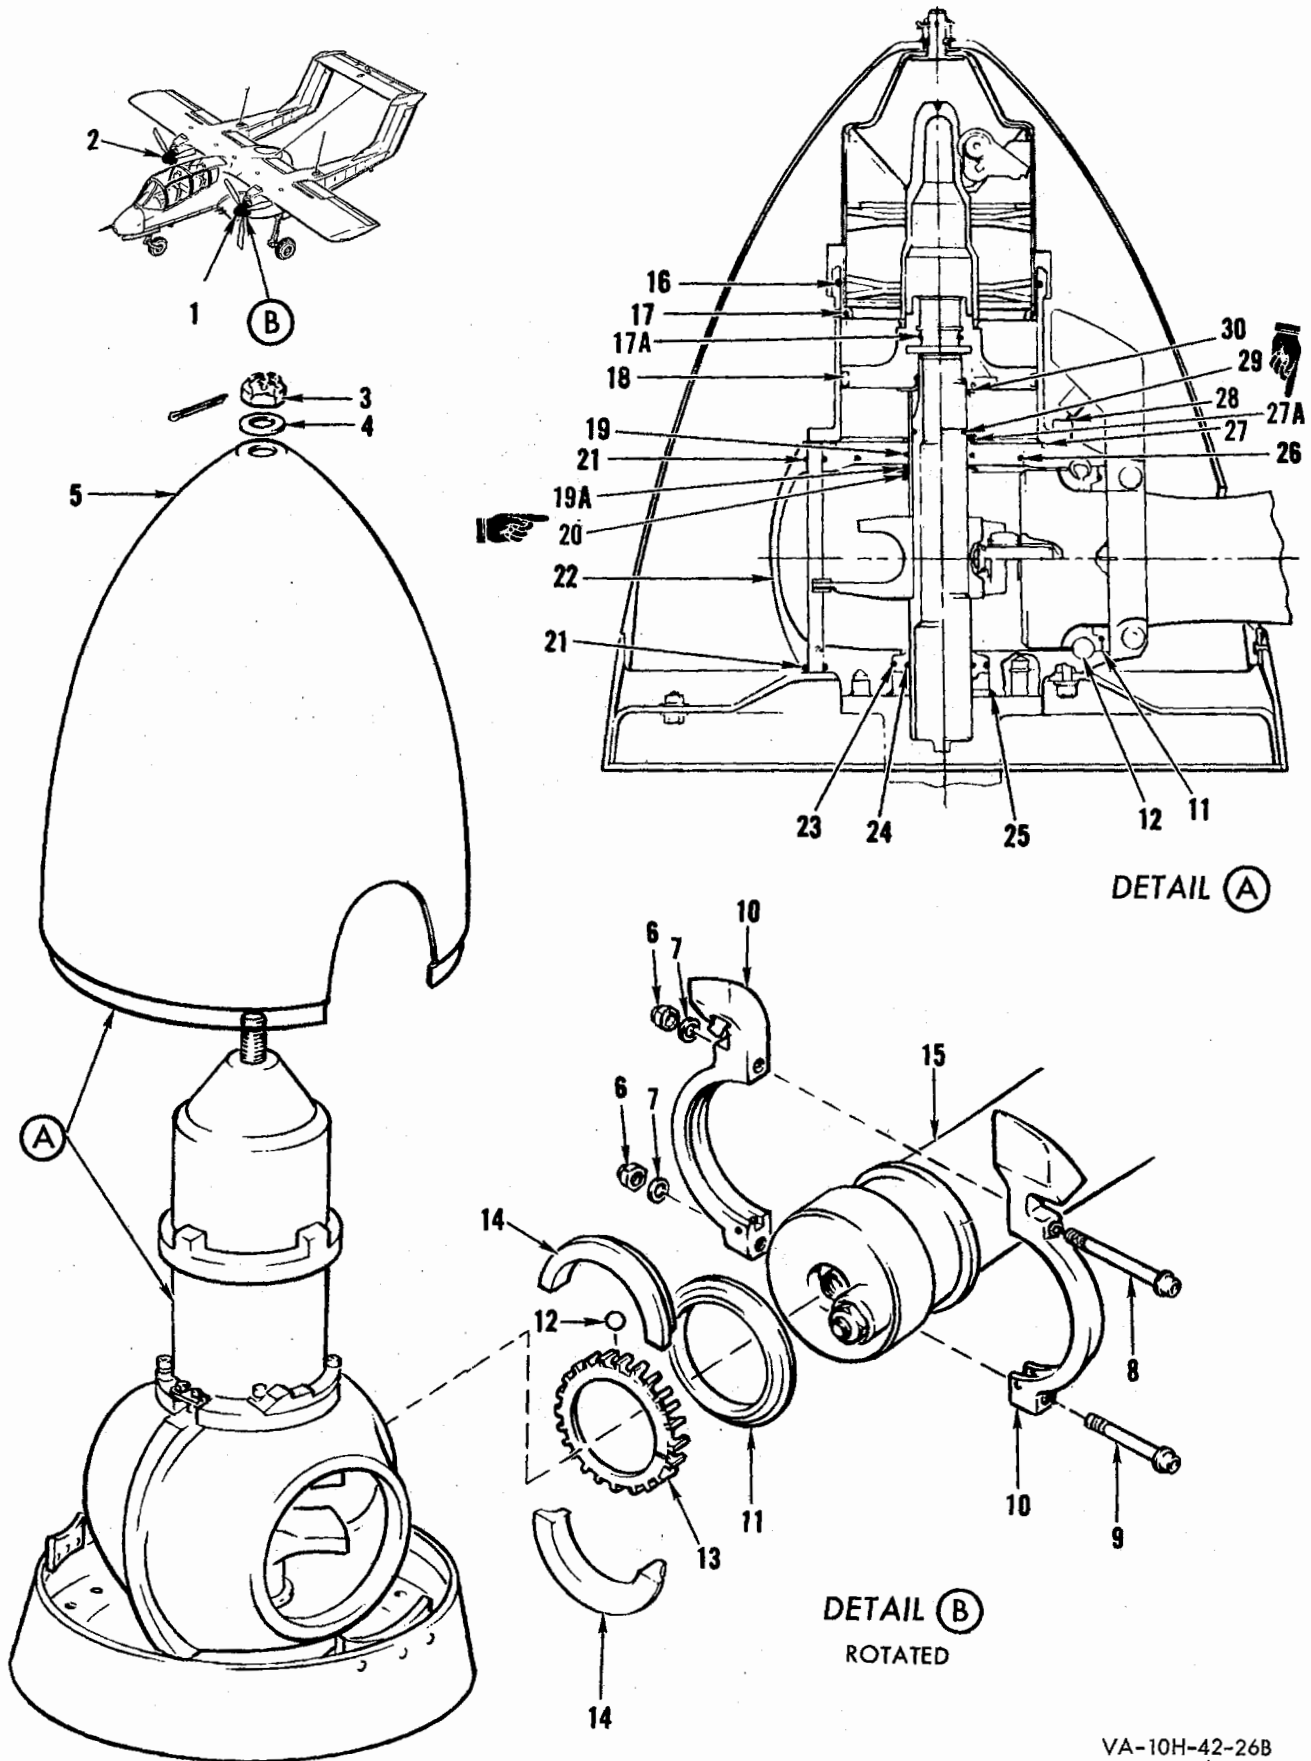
Pod Package - Variable Pitch Aircraft Propeller Assembly
